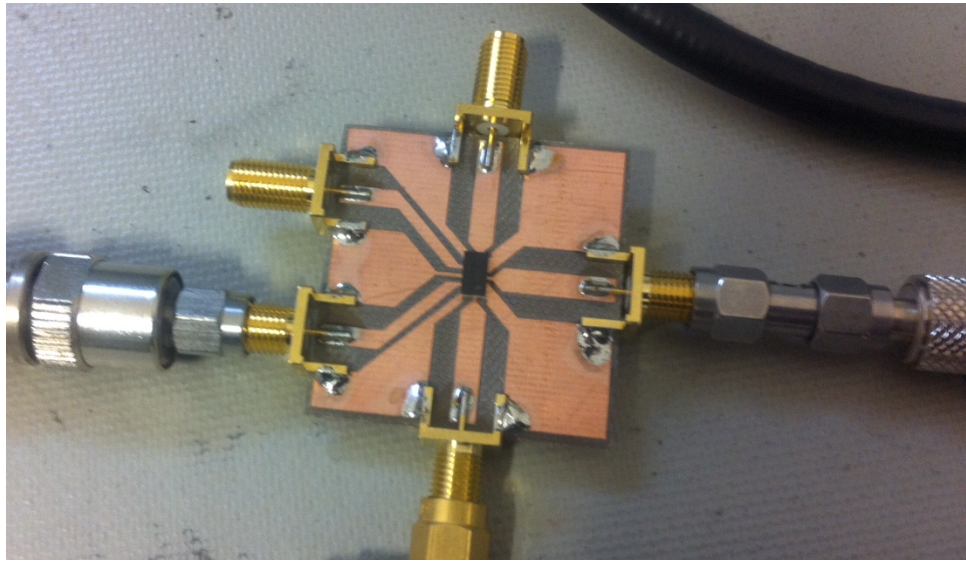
Photograph of PCB mounted Omron switch with connectors.
